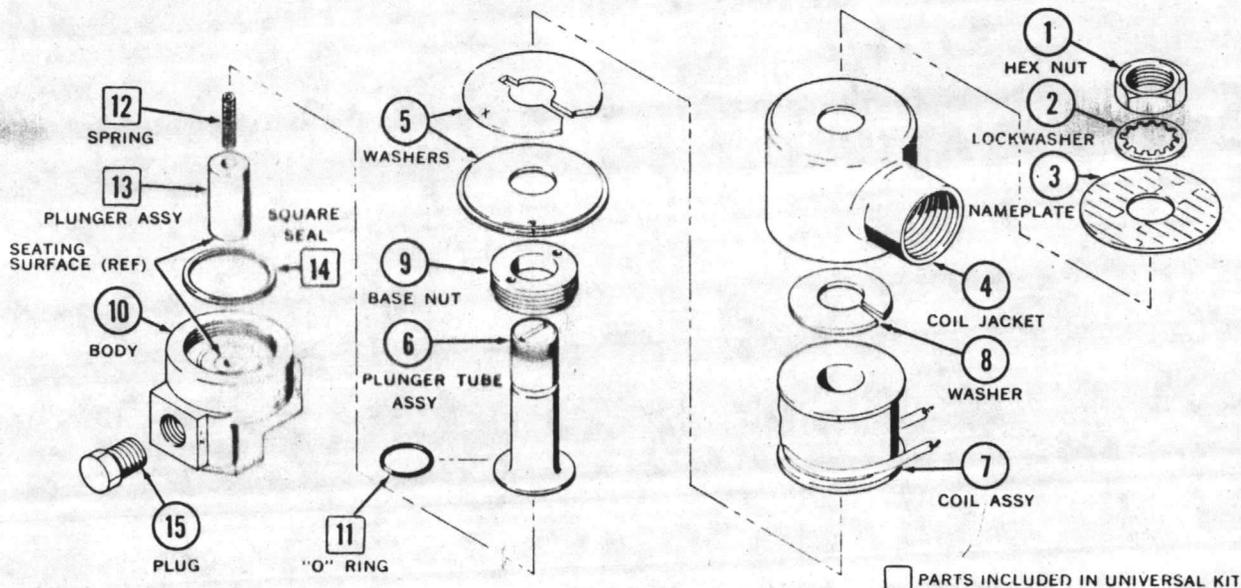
Exploded View of Typical S311 with Type "7" Body, Model "A" Valve, N.C.
